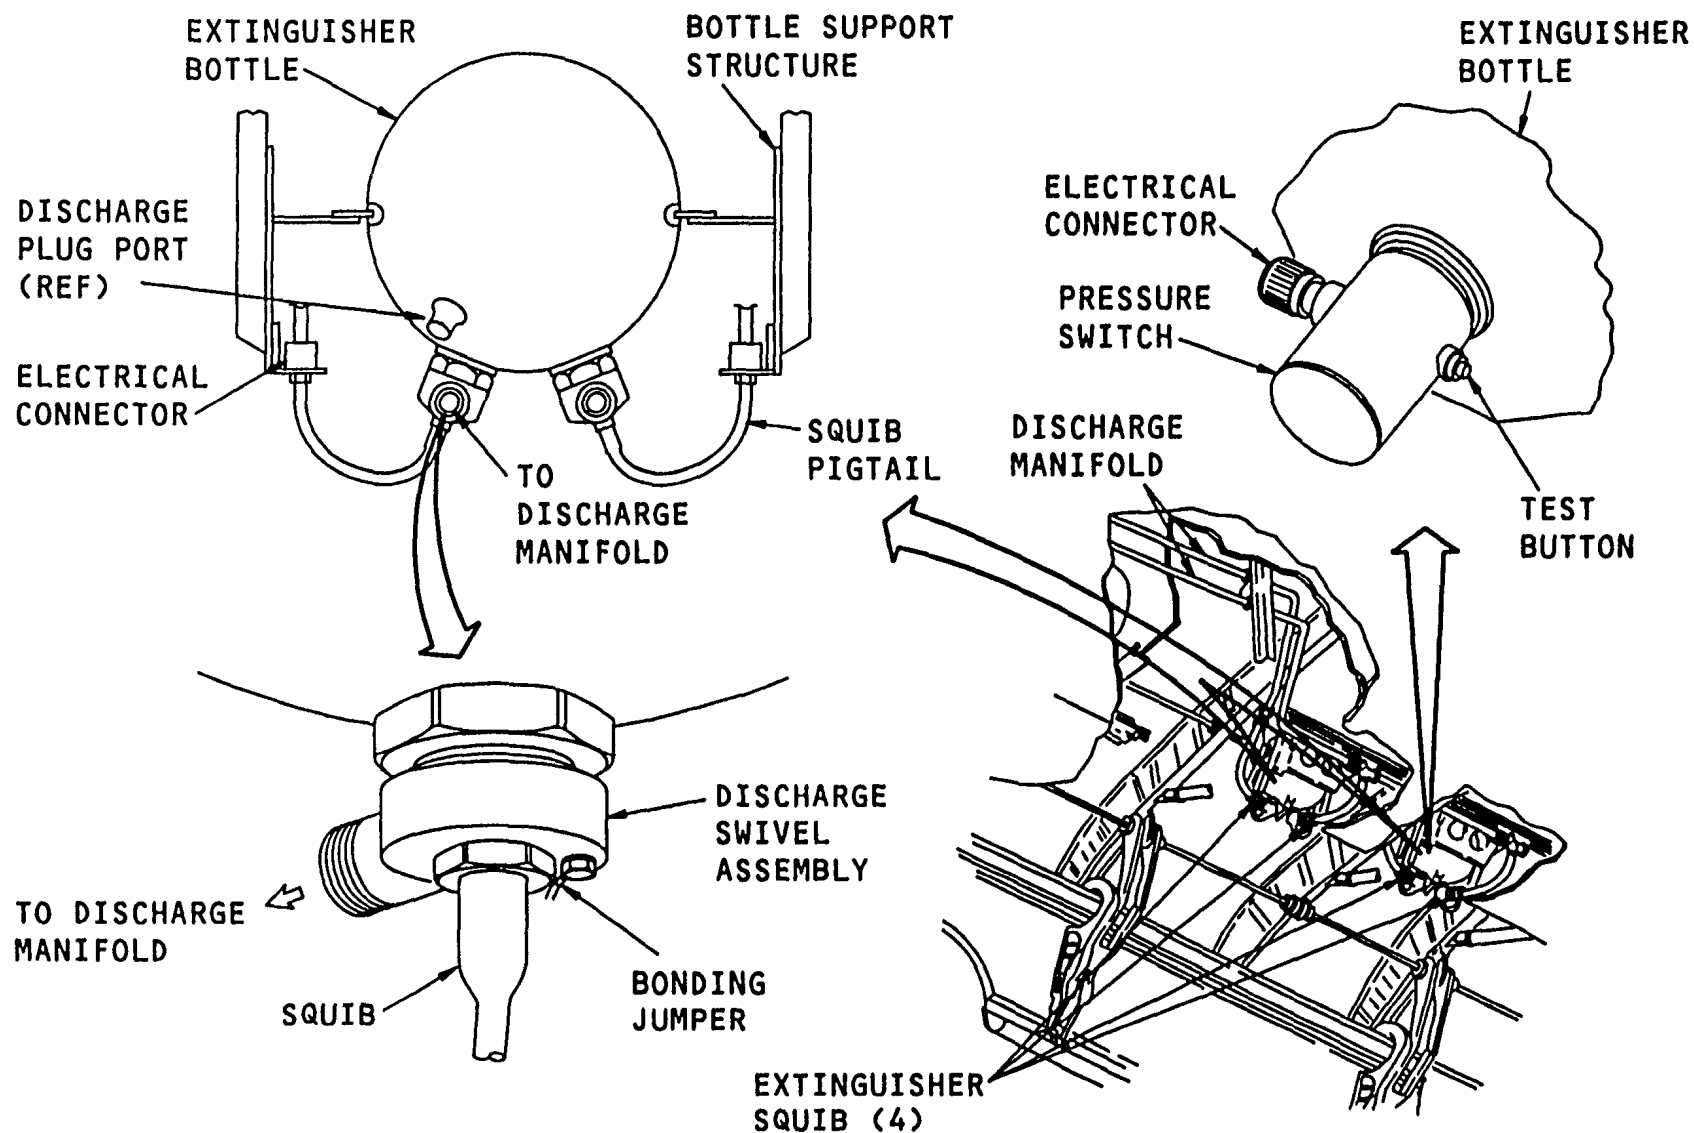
EXTINGUISHER BOTTLE COMPONENTS
